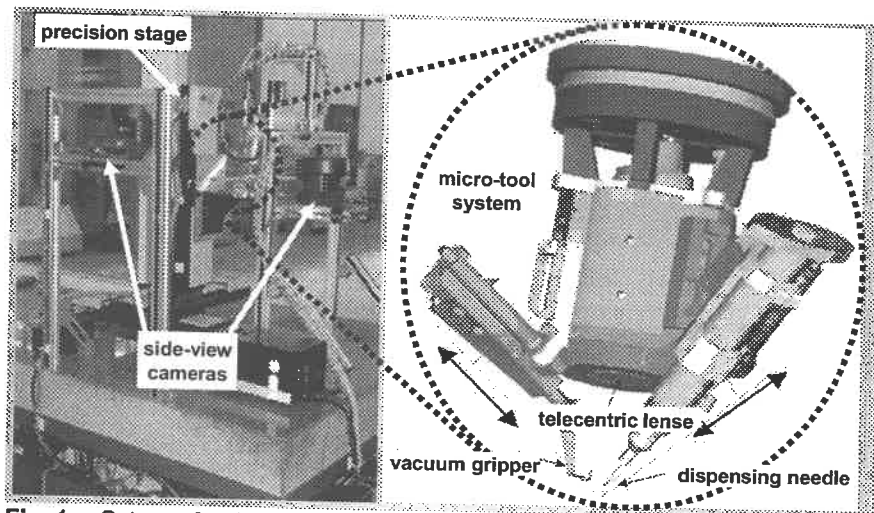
Setup of tele-operator end: overall view (left) and modular micro-assembly tool head (right)
